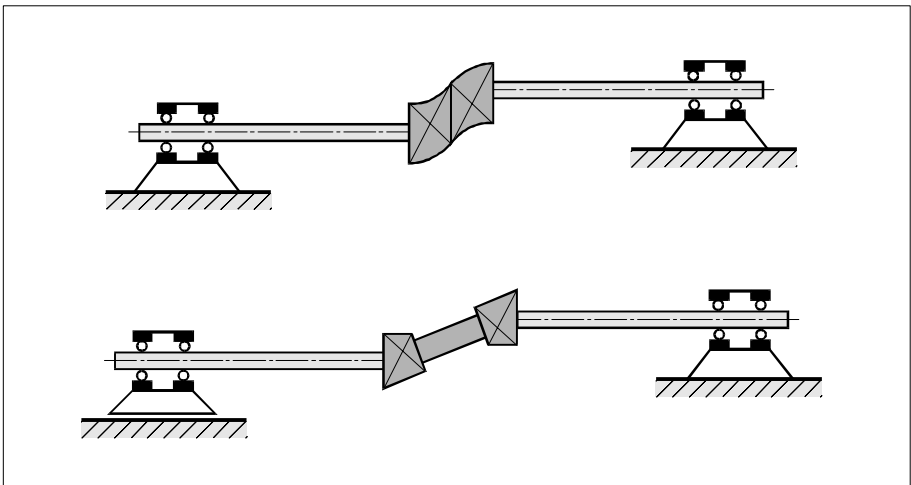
Radial parallel offset with compensating element, double joint coupling above, joint shaft below
